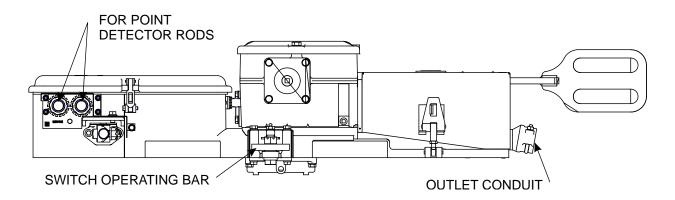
Outline Diagram of the M-23A, M-23B Switch Machines
